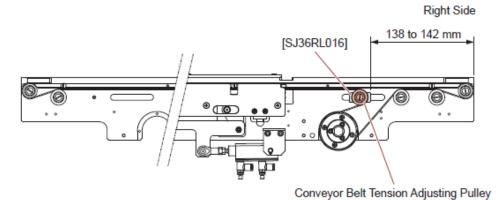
Adjust the Conveyor Belt Tension (BF-3Di-L1)
